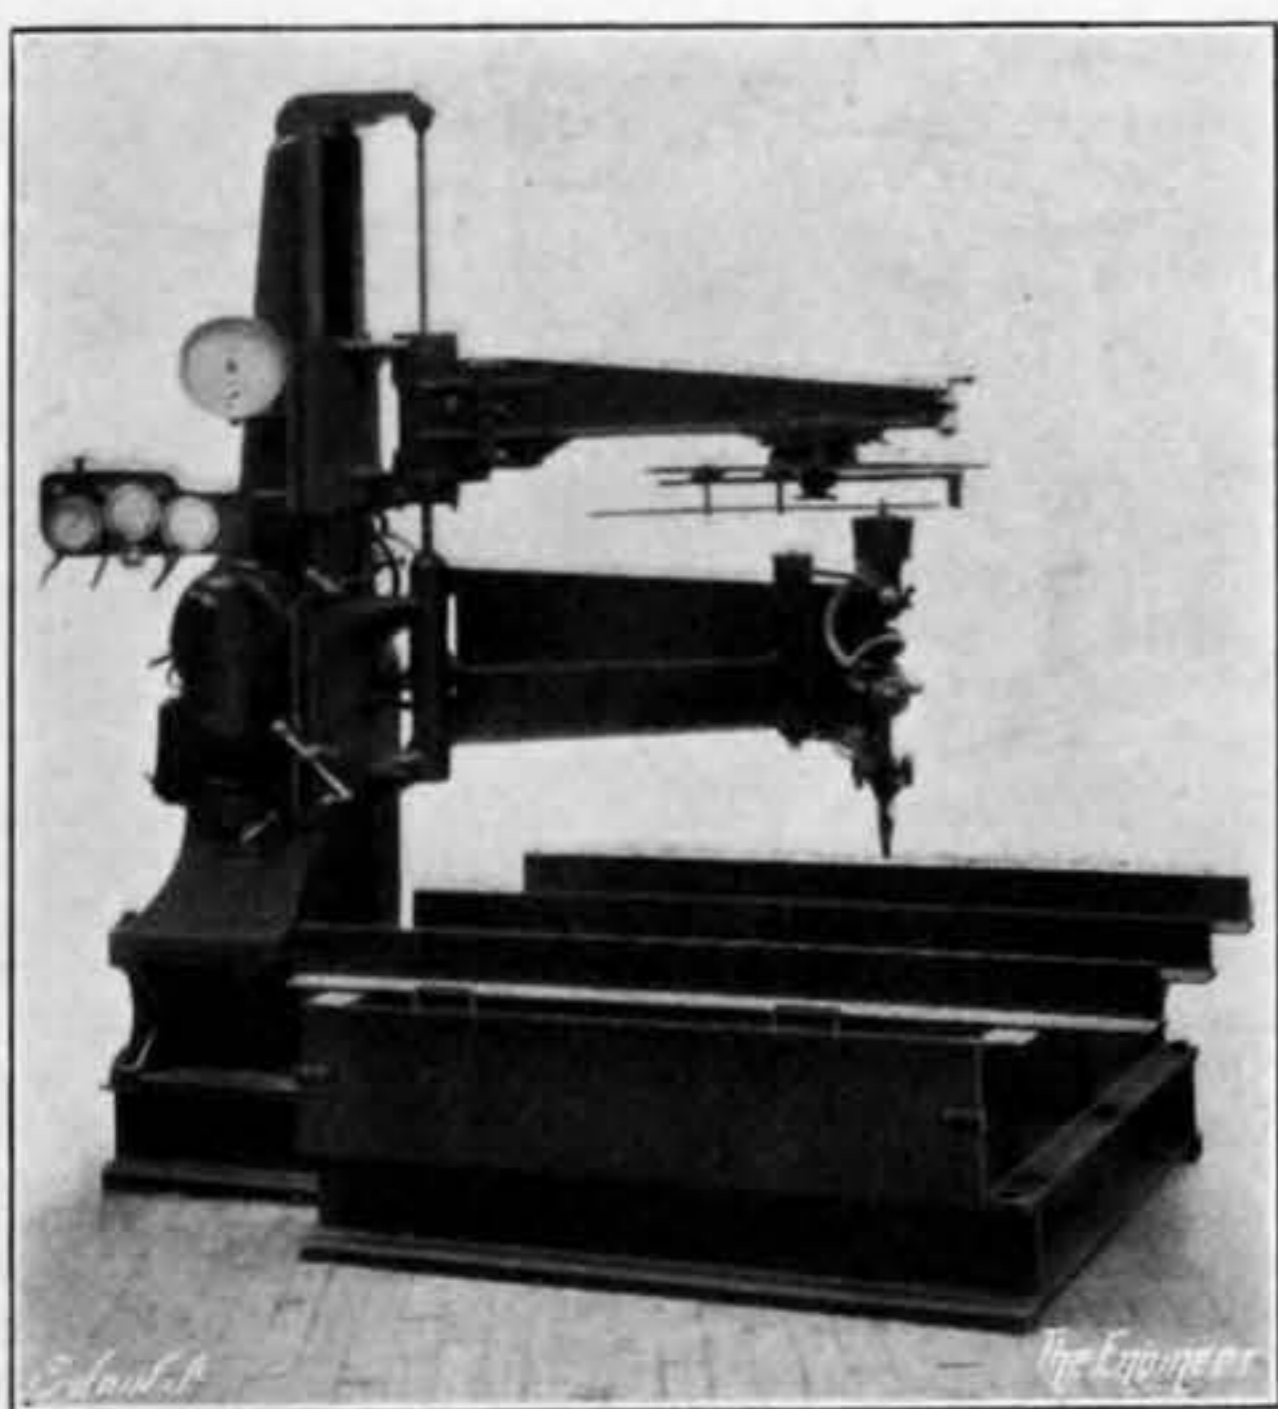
OXYGEN CUTTING MACHINE—BRIT. OXYGEN
